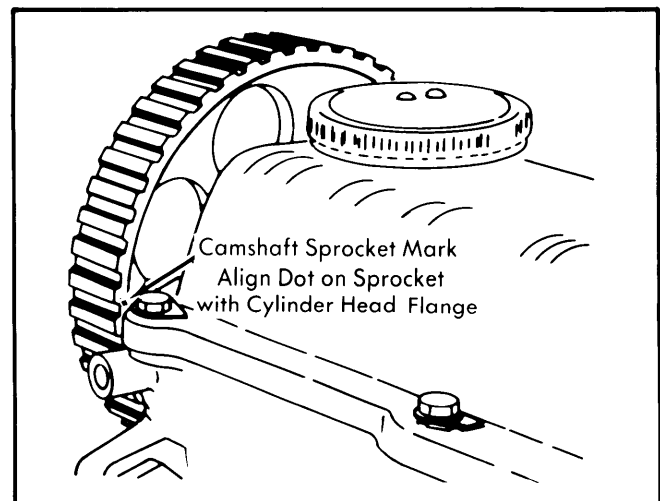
Index Mark on Camshaft Sprocket Aligned with Cylinder Head Flange
